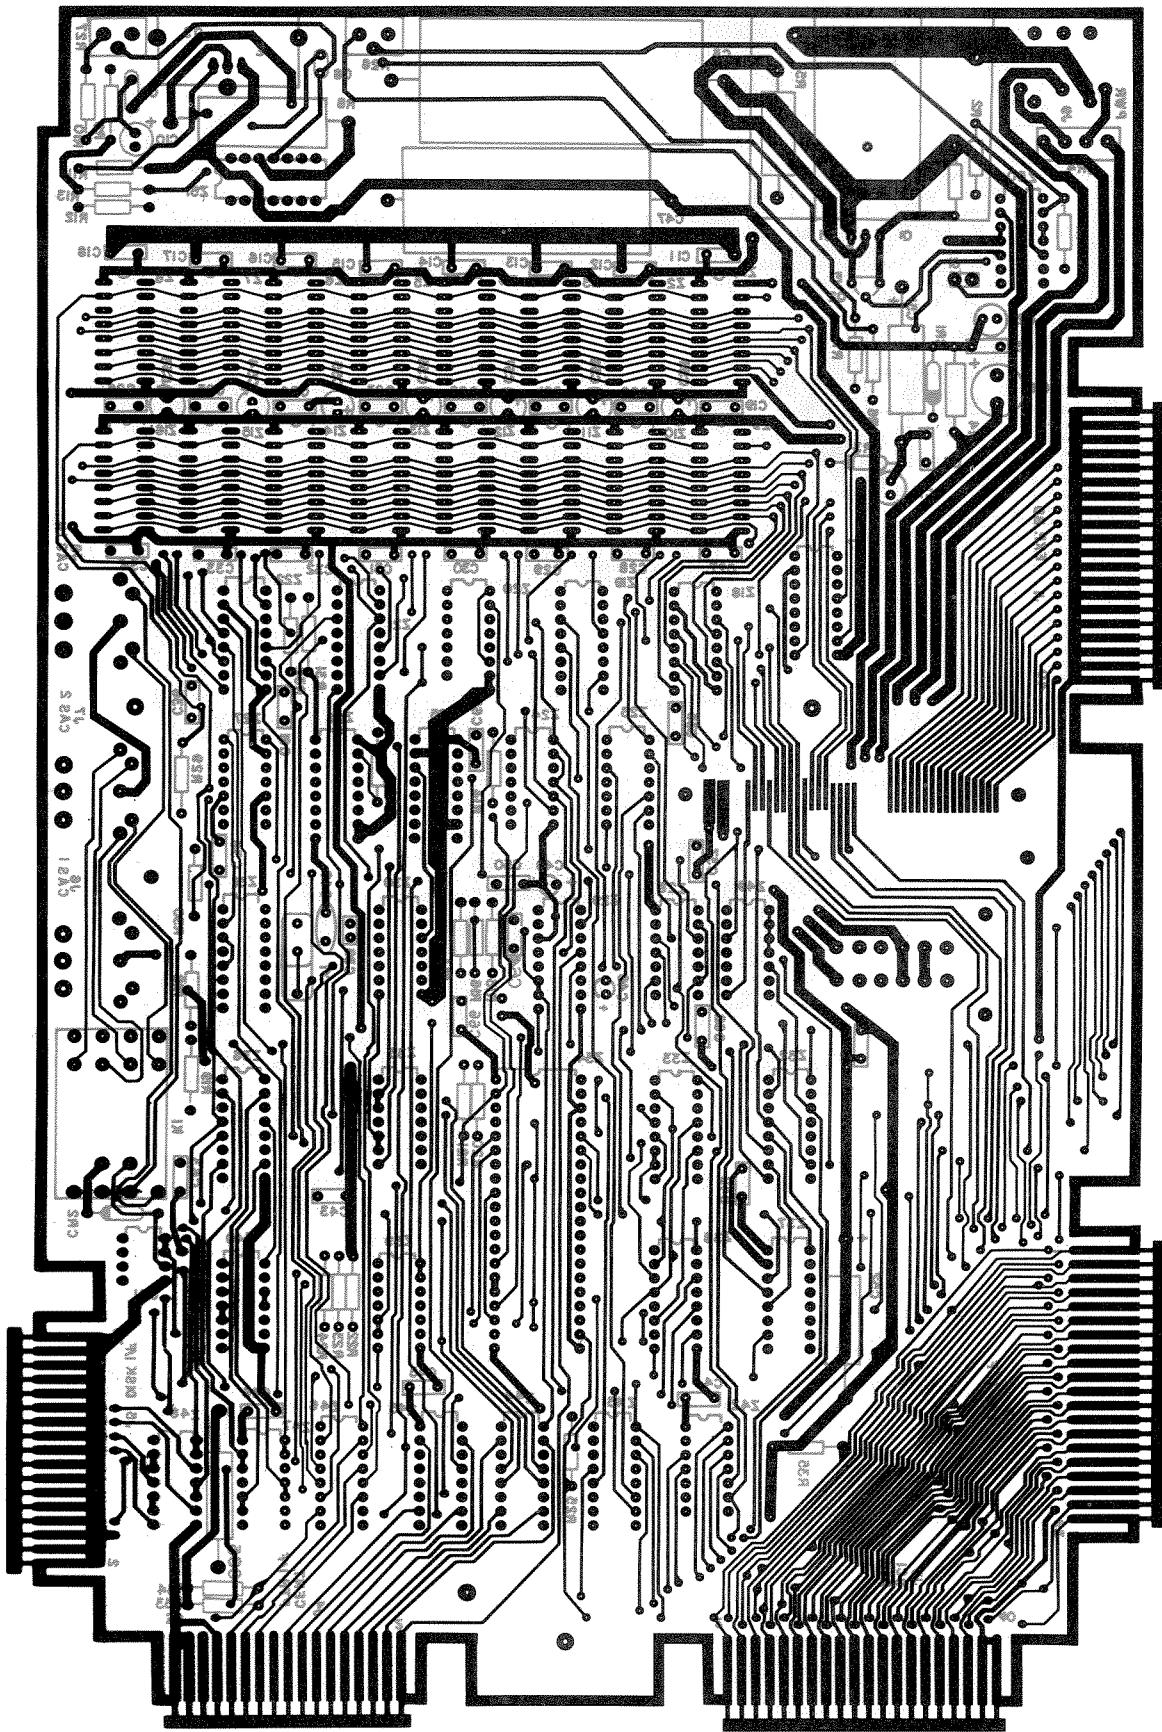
EXPANSION INTERFACE P.C. BOARD (BOTTOM VIEW)
